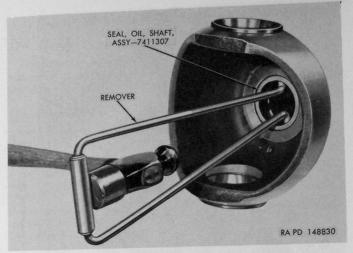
Removing shaft oil seal assembly using remover 41-R-2371-850.
